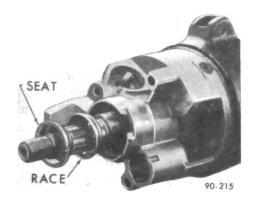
Removing Upper Bearing Inner Race and Inner Race Seat
